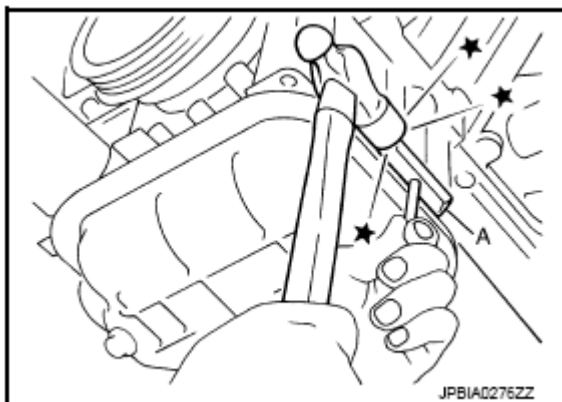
Inserting Seal Cutter Between Upper And Lower Oil Pan
